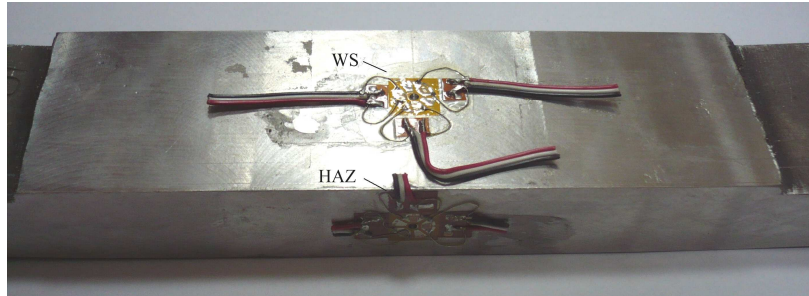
The strain gauges set-up for residual stresses measurements: on welding surface (WS) and in the heat affected zone (HAZ)
